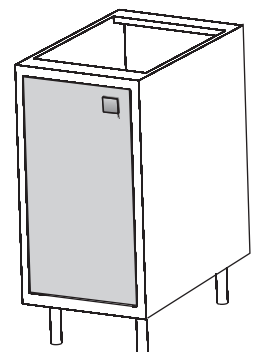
INSET DOOR - SKILLED INSTALLATION
